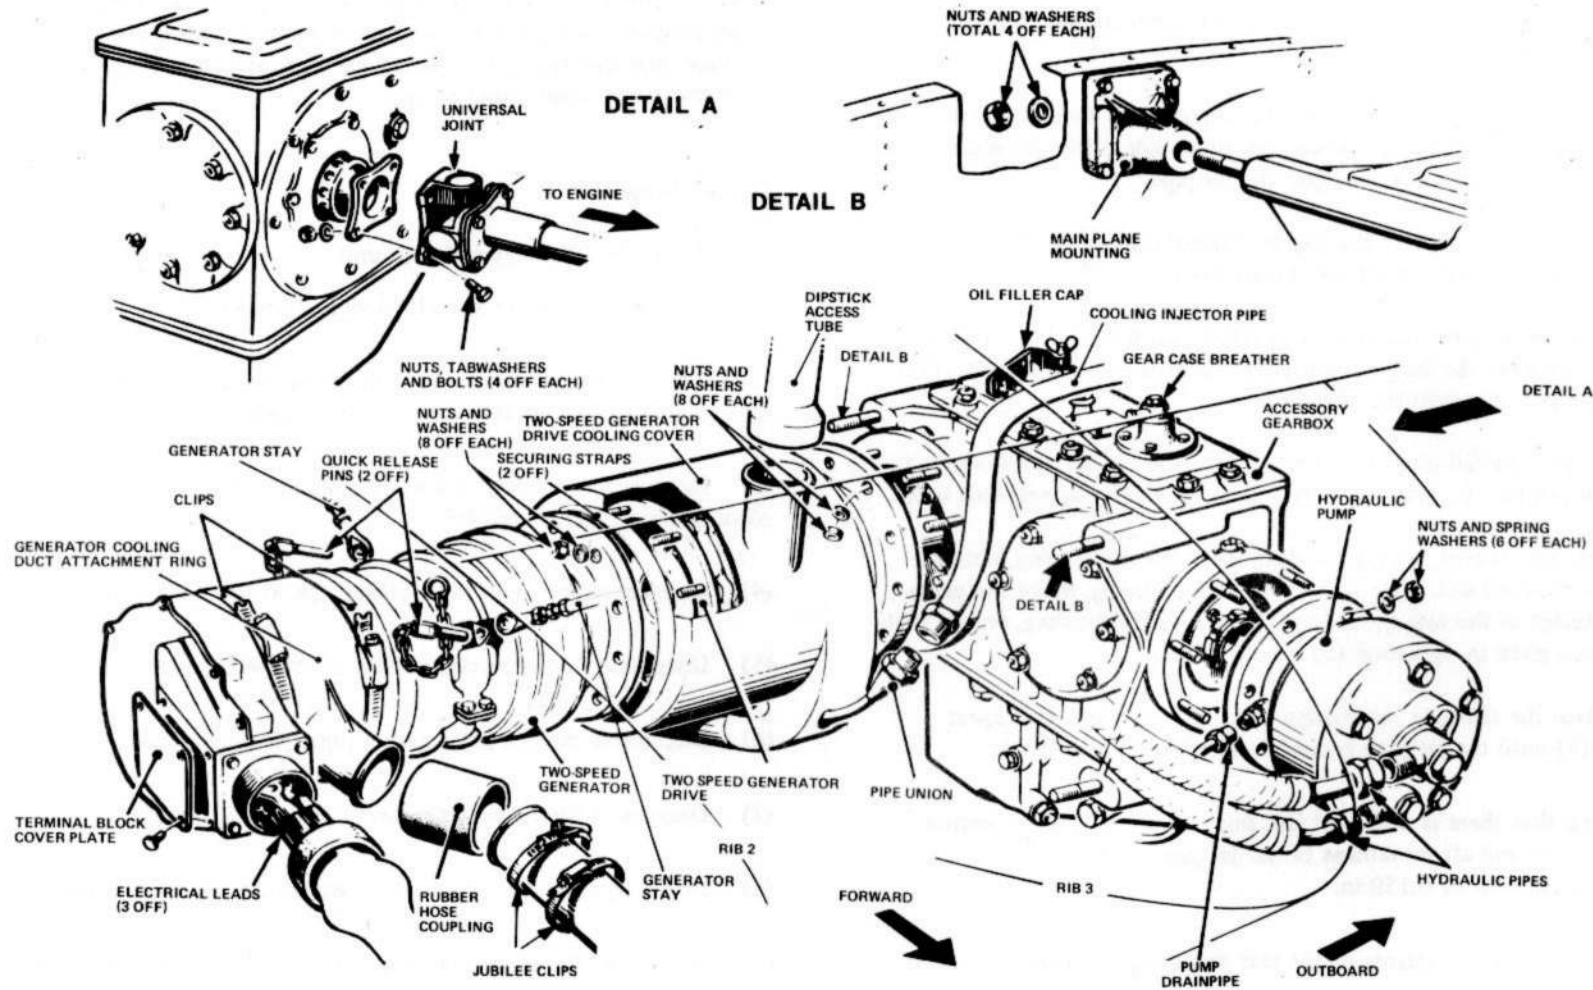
ACCESSORIES GEARBOX - REMOVAL AND ASSEMBLY
